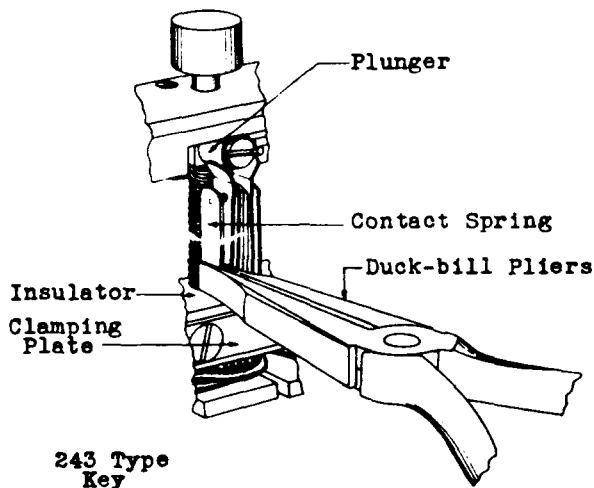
Method of Adjusting for Contact Separation, Spring Clearance, Contact Pressure, Contact Follow and Contact Sequence
